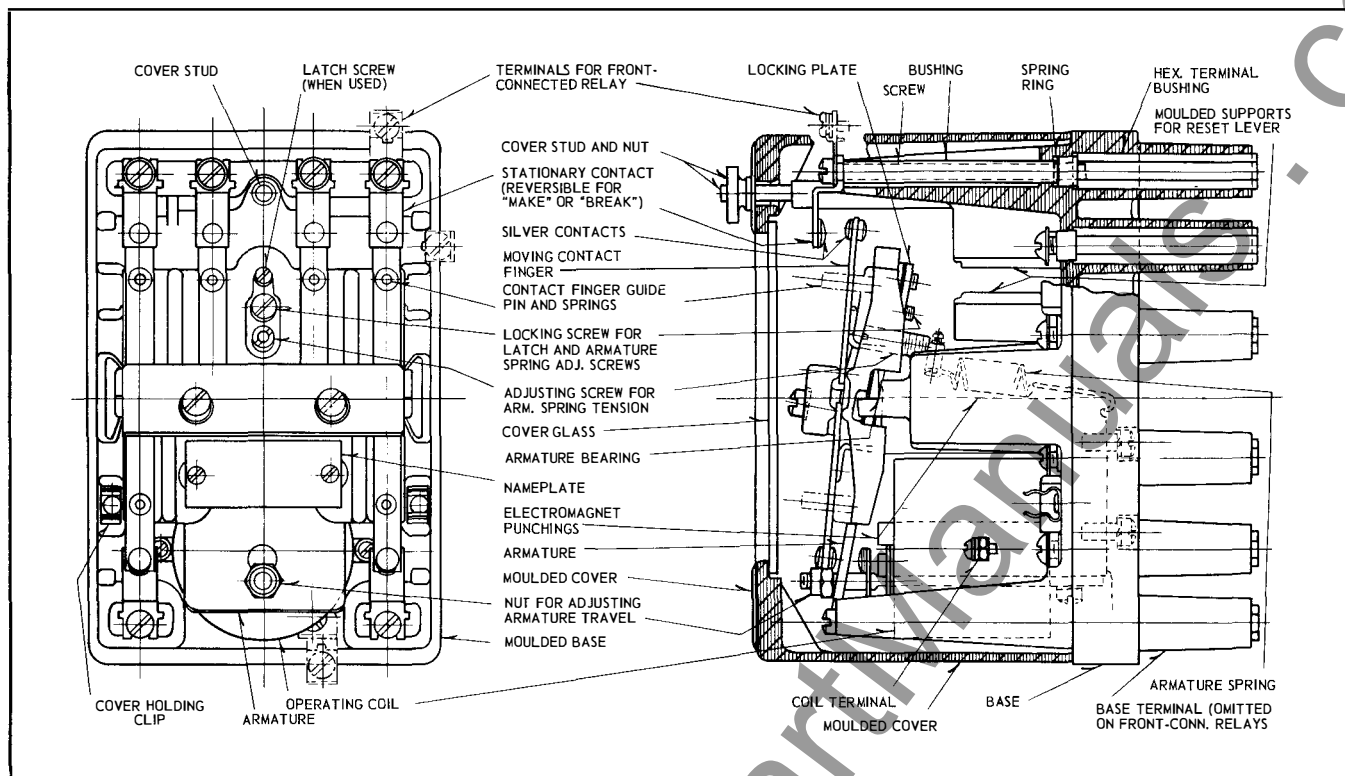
Front View (Cover Omitted) and Side View of the Type MG-6 Self Reset Relay in Molded Case.
